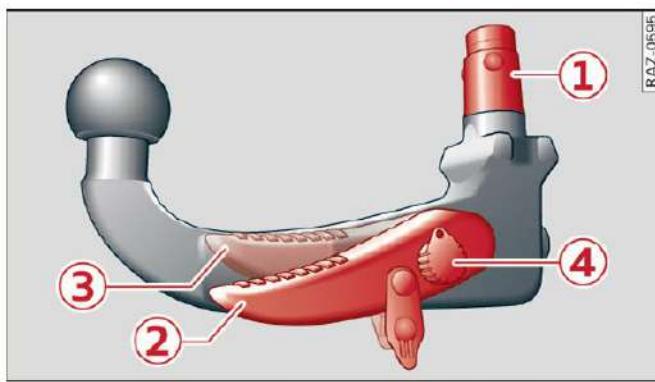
Removable towing bracket: Ball joint with spring in "ready" position
